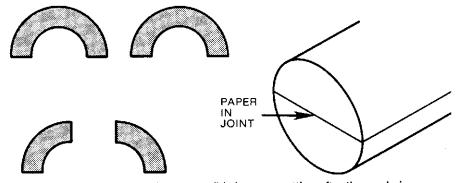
Shapes like this are possible by cove cutting after the workpiece has been turned to a cylinder on the lathe.
